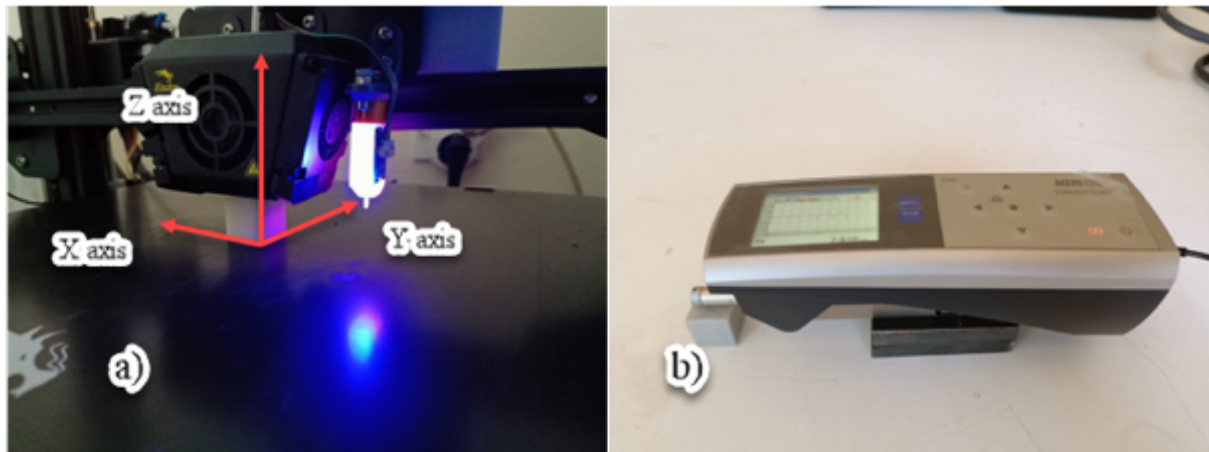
a) Indication of the axes of the sample for surface measurement b) Surface roughness measurements
